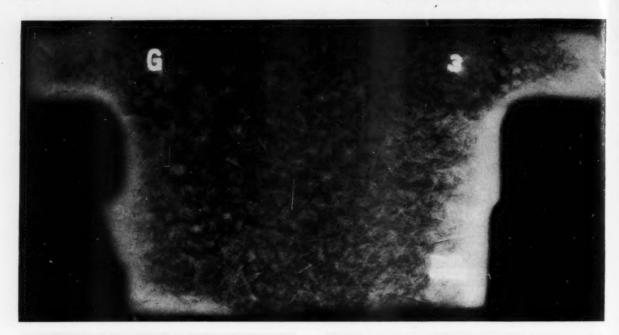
Radiograph of 1/4 inch thick slab, a mid-section of a gun metal high pressure manifold casting.
